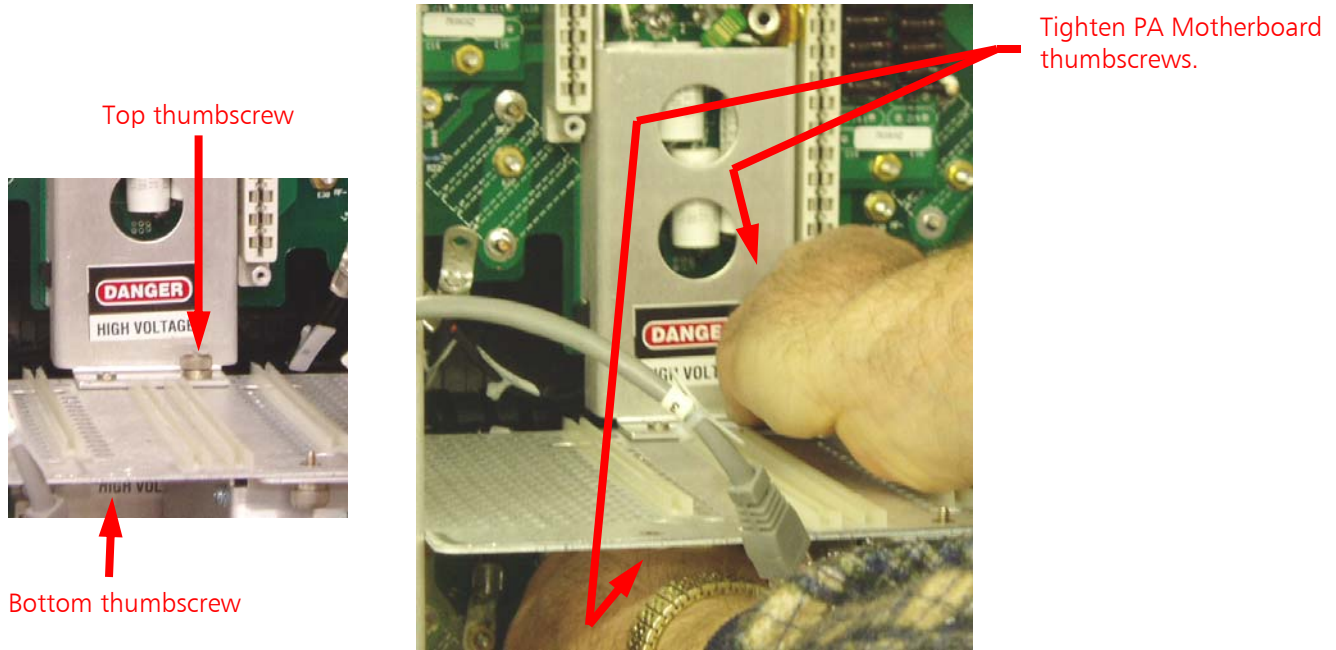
Tighten PA Motherboard Bracket Thumbscrews
